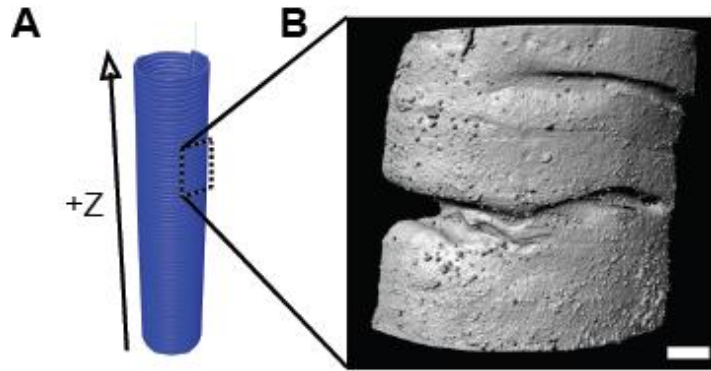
Visualization of PDMS layers in a FRE printed tube. (A) The G-code used to generate the perfusable PDMS tube shown in Figure 4J. (B) 3D visualization of the fused layers based on confocal imaging. A relatively large surface defect is shown to illustrate that there are regions with fusion that are less than ideal. Scale bar is 500 μm .
